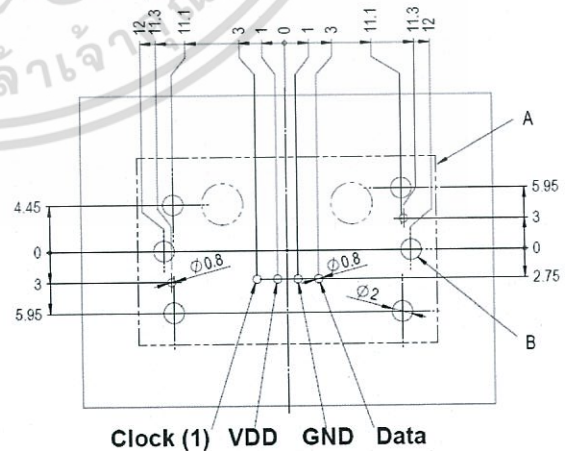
Footprint for PCB mounting. (top view = sensor side). All dimensions in mm.
